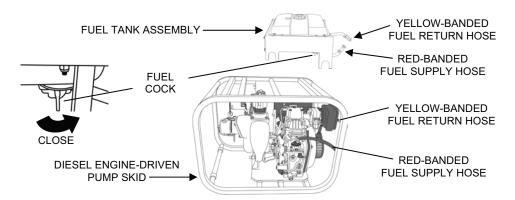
Diesel Engine Fuel Tank Assembly Removal.
